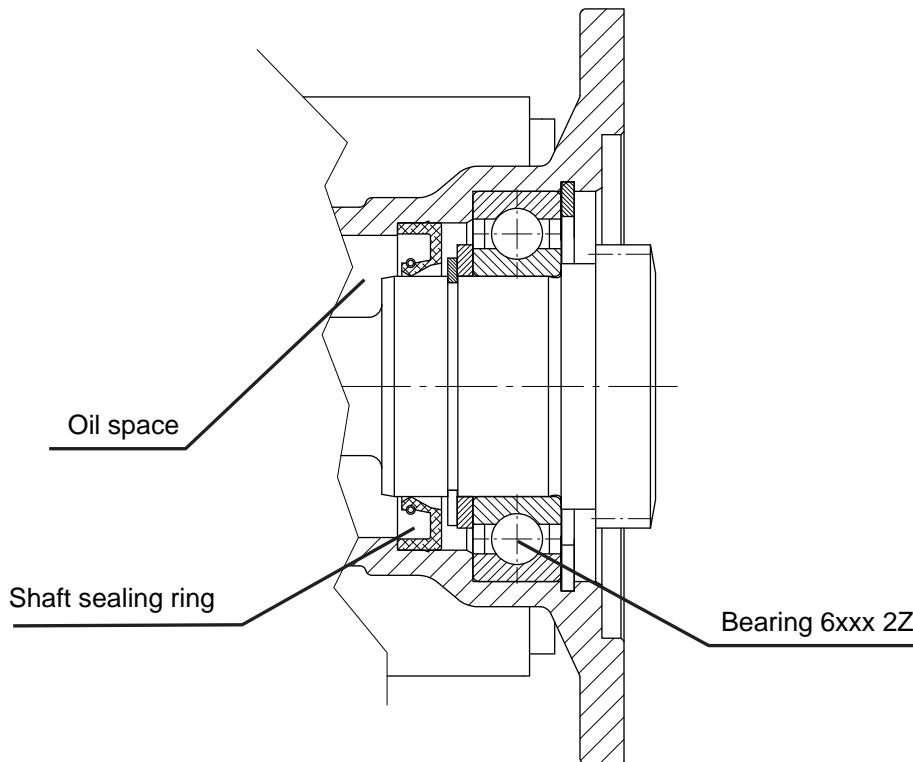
Drive shaft bearing and seal on the coupling side of universal worm gear units
